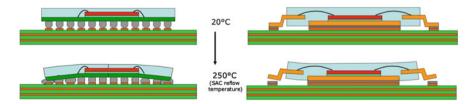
Schematic drawing of excessive warpage at reflow temperature resulting in shorts (*left*) or opens (*right*) after soldering
